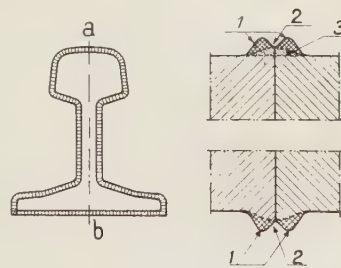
Electric flash welding. Dead head produced by the forging pressure.
